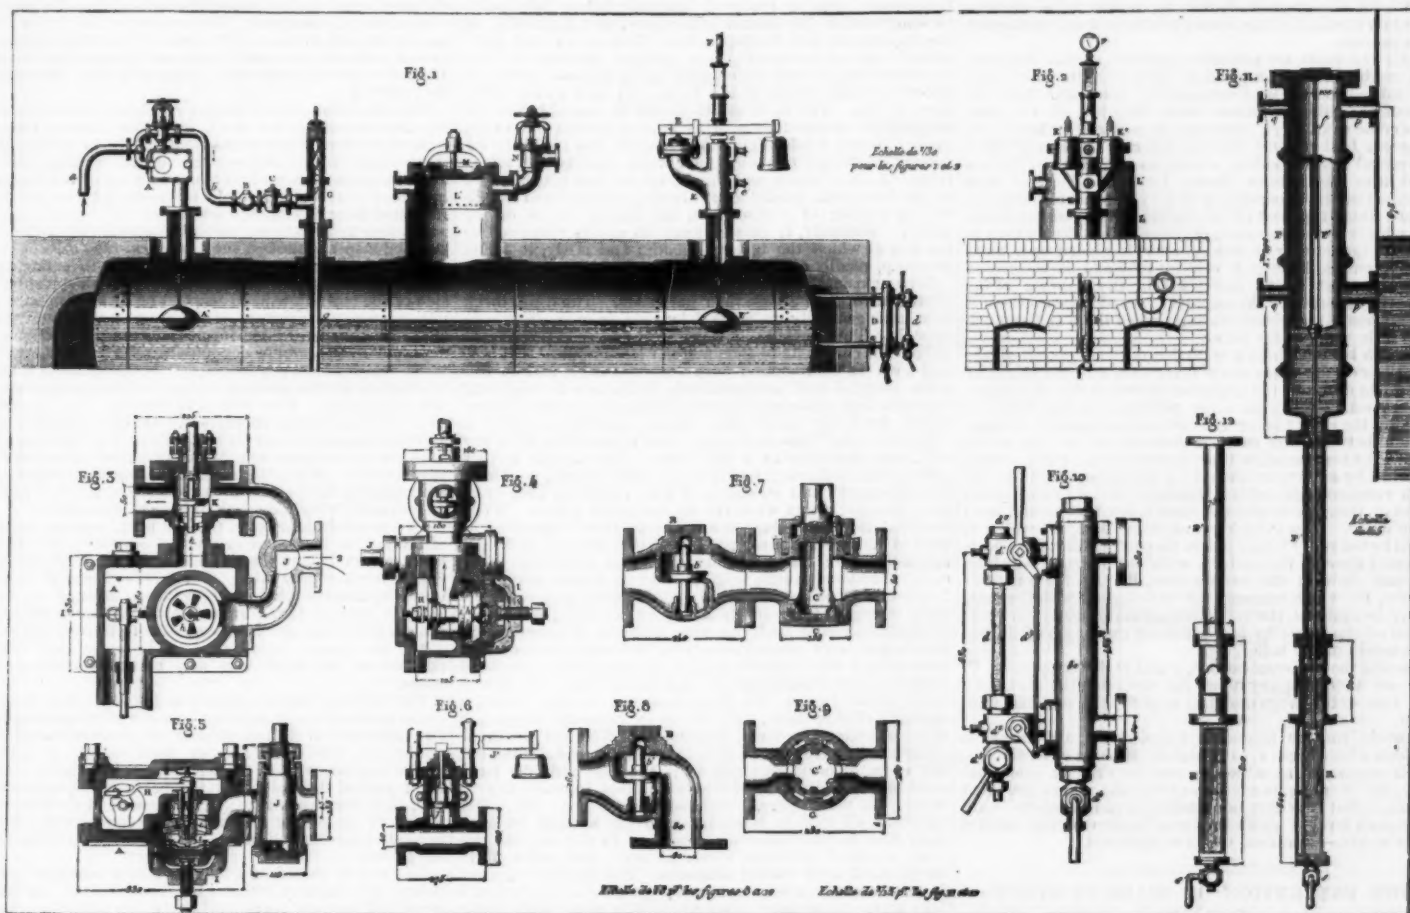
Feed Apparatus; Stop Valve; Indicator. Fig. 2.—Indicator. Figs. 3 to 6.—Regulator. Figs. 7 to 9.—Check Valve and Cock. Fig. 10.—Tubular Water Gauge. Figs. 11 and 12.—Indicator.
